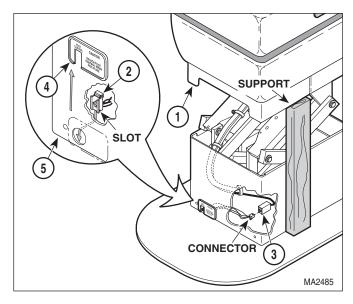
Foot Control Plug-In Port Removal / Installation
